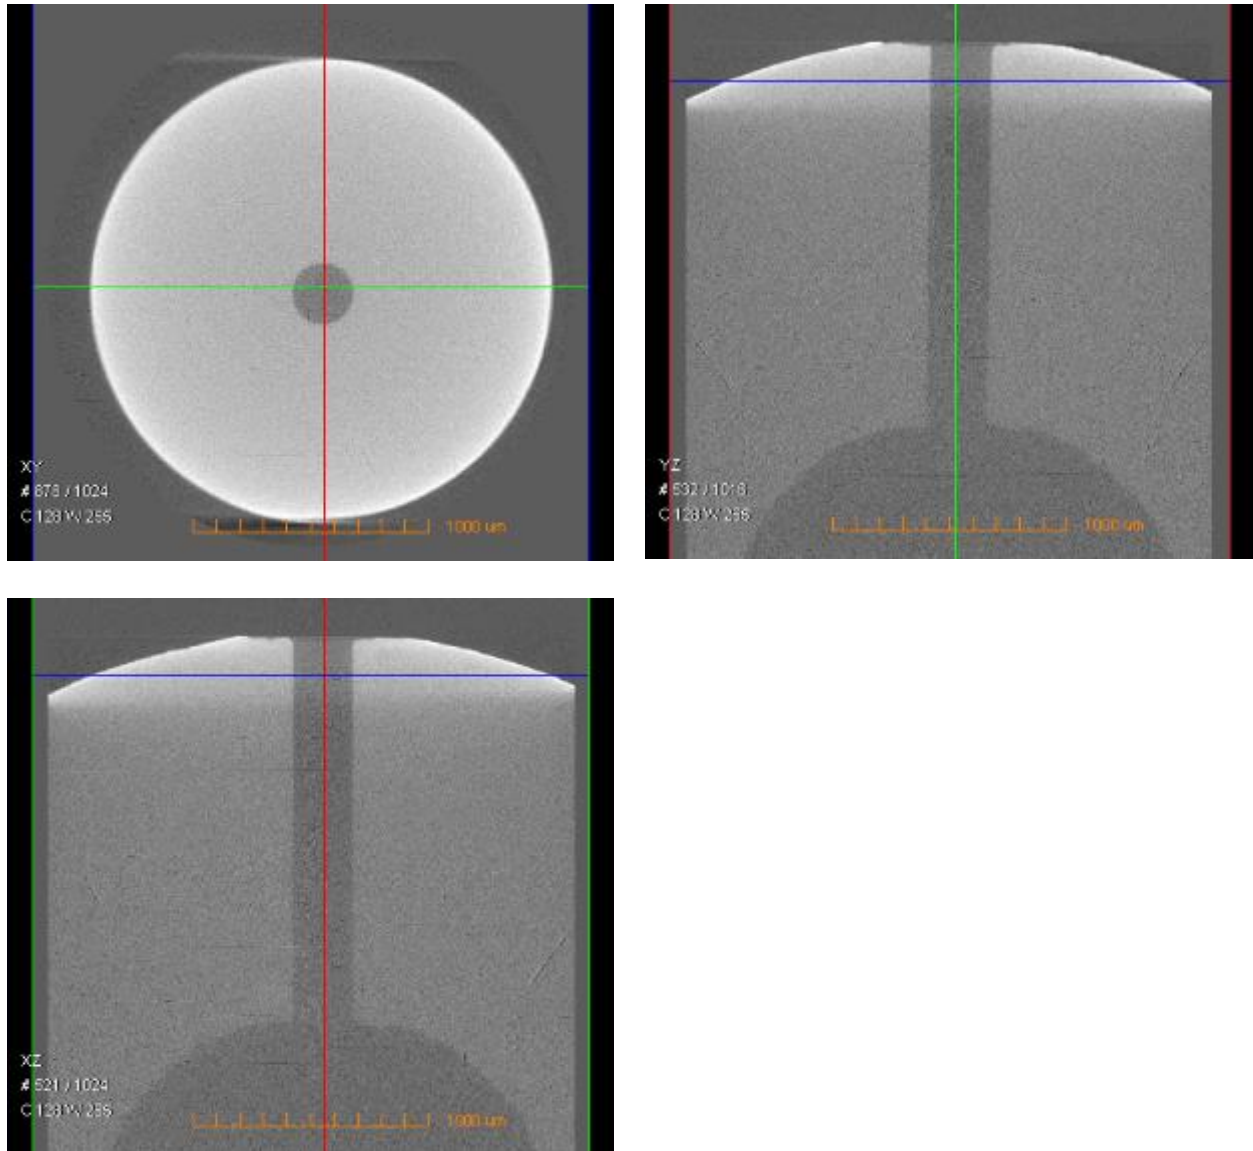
X-Ray Tomography measurement of sac and nozzle geometry from different cross-sectional views. The images illustrate a hemispherical and a cylindrical sac and nozzle hole respectively.
